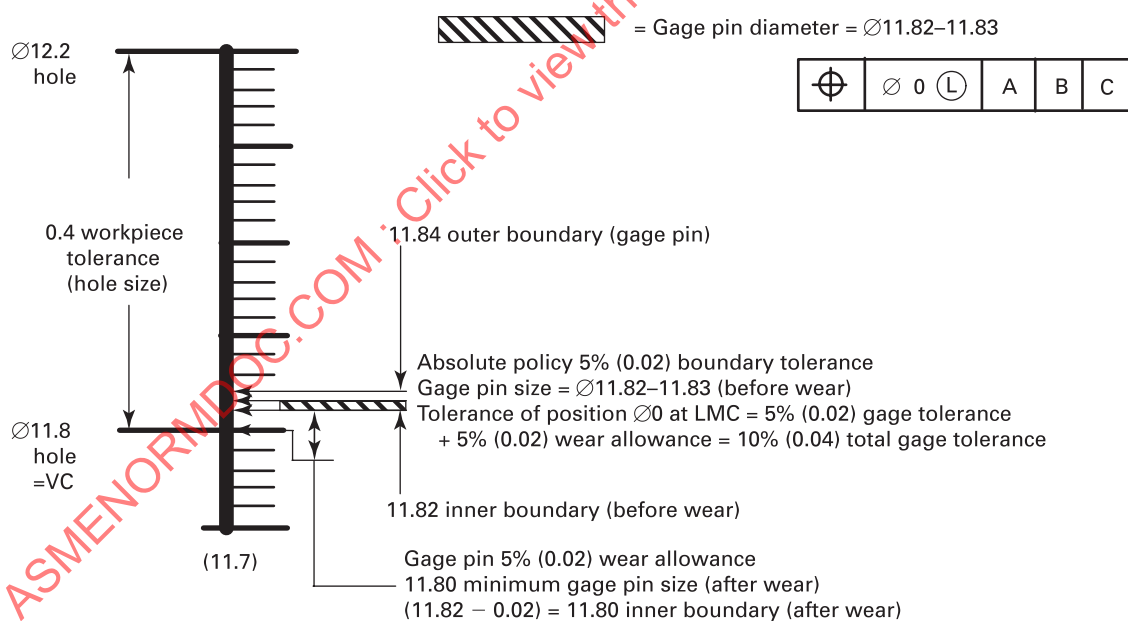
(e) Absolute — Adjusted Boundary Based Gage Tolerance Method
